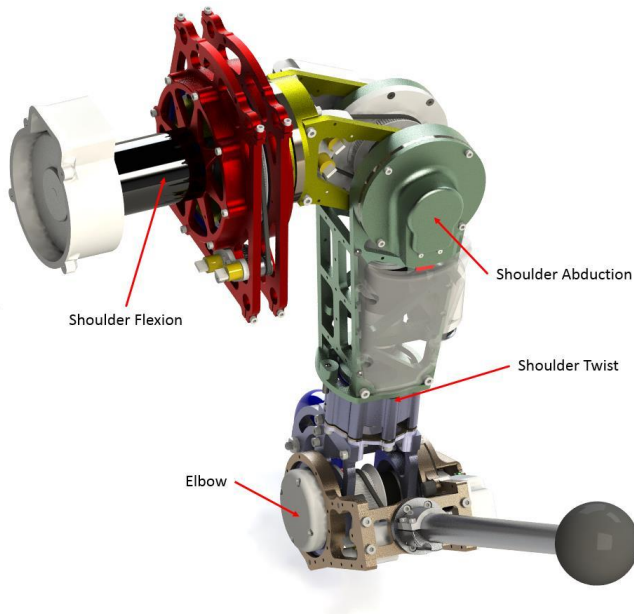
Rendering of an arm consisting of four four joints equipped with SEAs.
